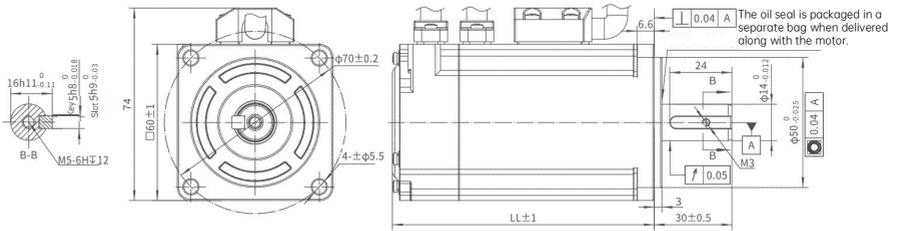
Frame No. 60 servo motor dimensions (with brake)
